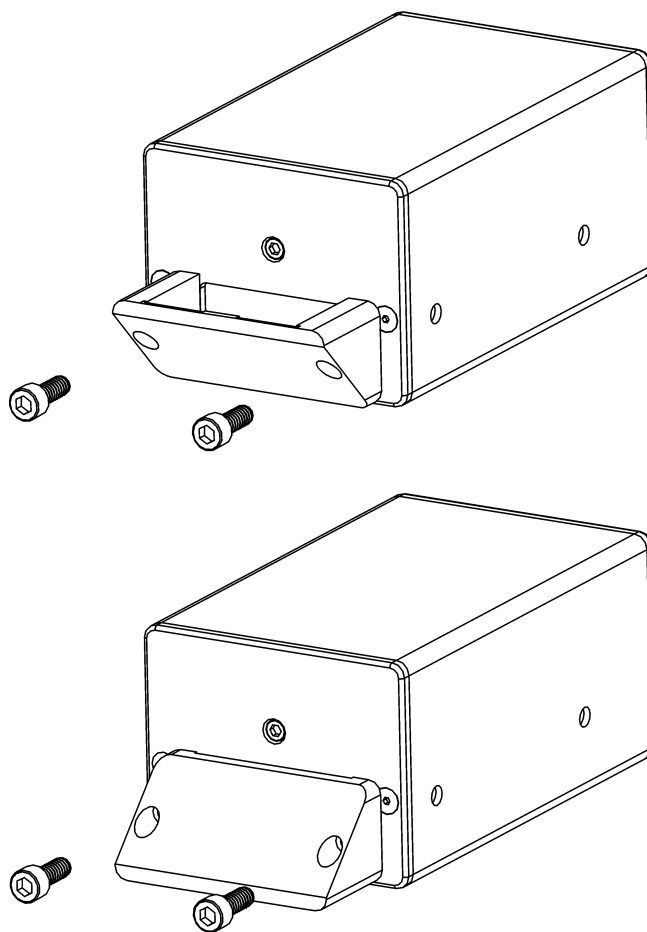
Attaching the 1701 Horizontal Mirror Mount
